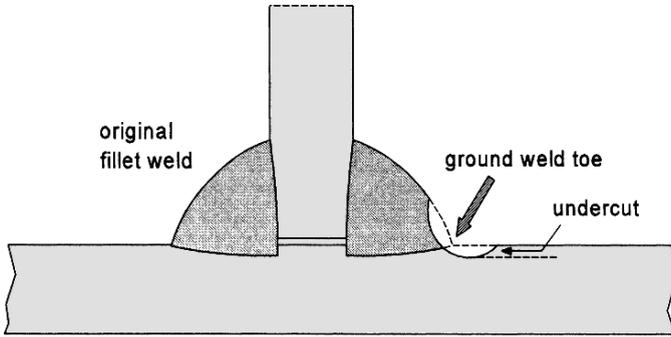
Increased root radius of the weld toe obtained by grinding.
